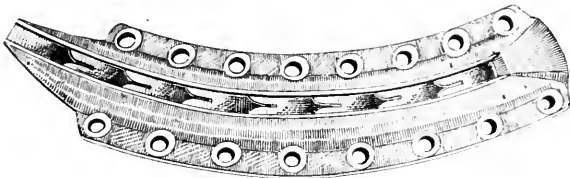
IMPROVED INLET NOZZLE FOR STEAM TURBINES WITH A PORTION OF THE VANE CUT OUT
